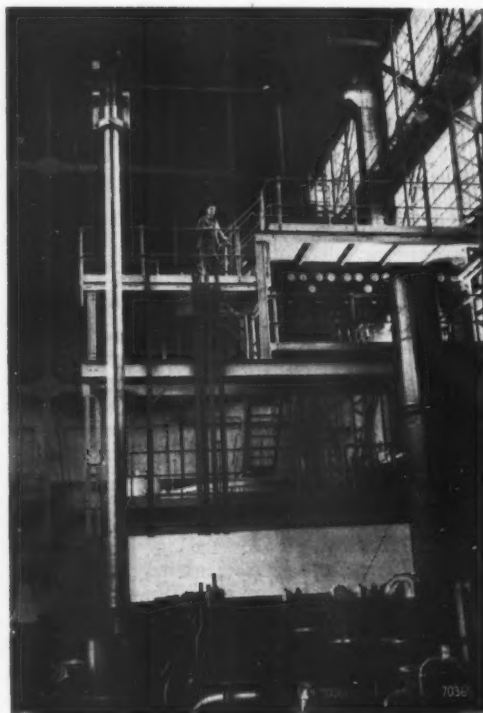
6-in. gun barrel with anode and fittings assembled about to be lowered into plating tank at the A.R.D.E. plant.
